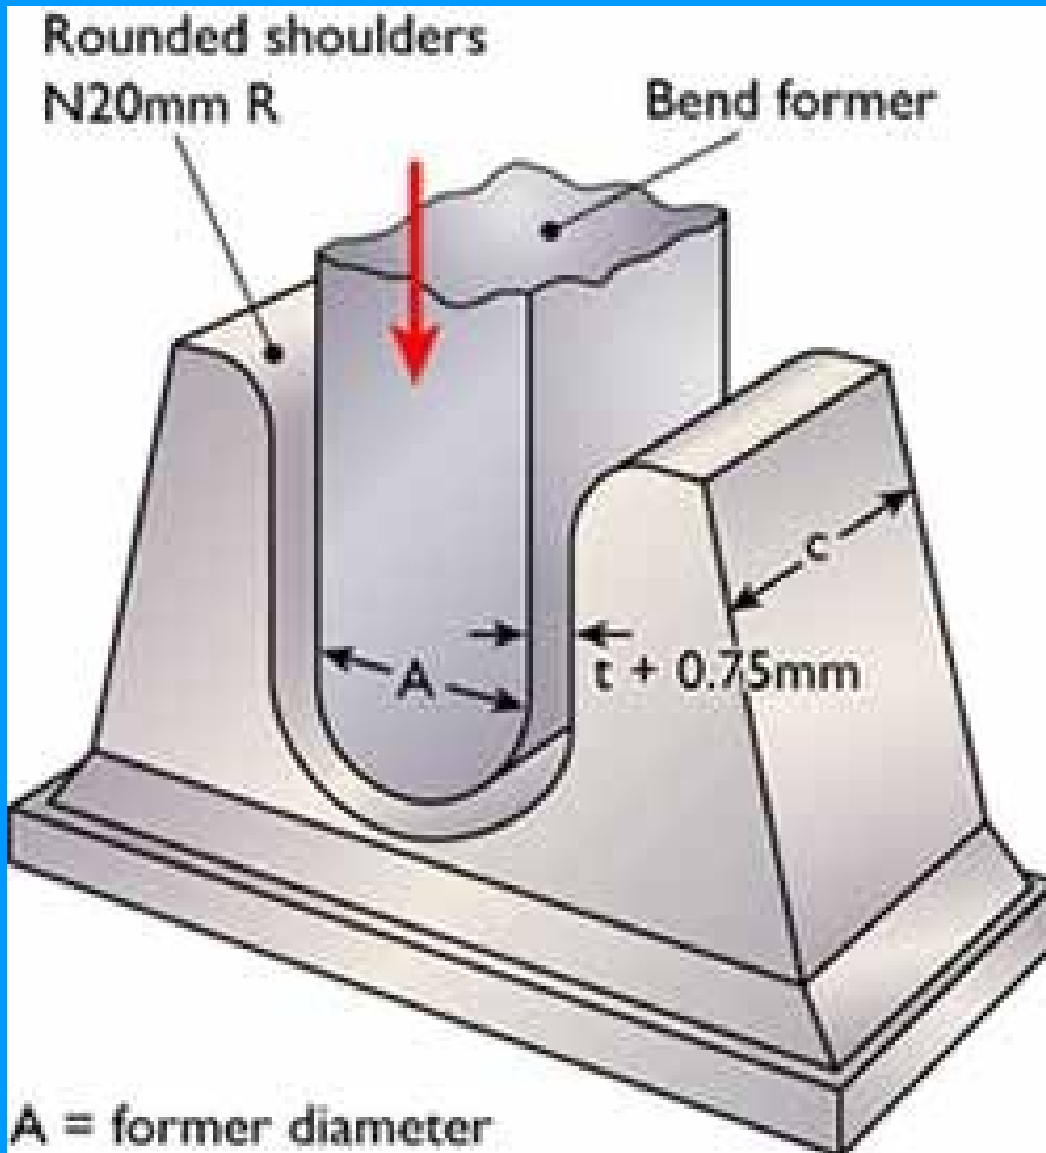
(a) shows a guided bend test jig that uses a male and a female former, the commonest form of equipment
